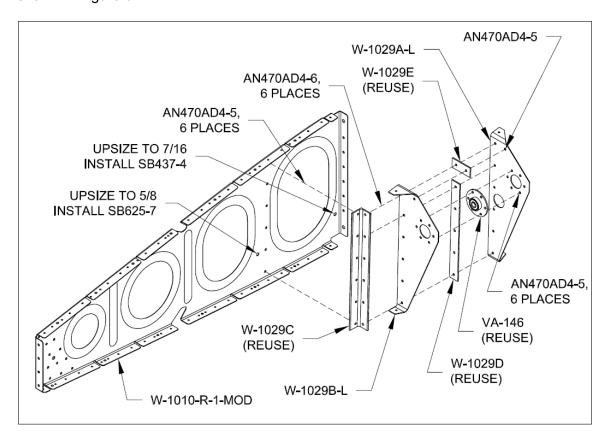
TORQUE TUBE SUPPORT BRACKET ASSEMBLY
